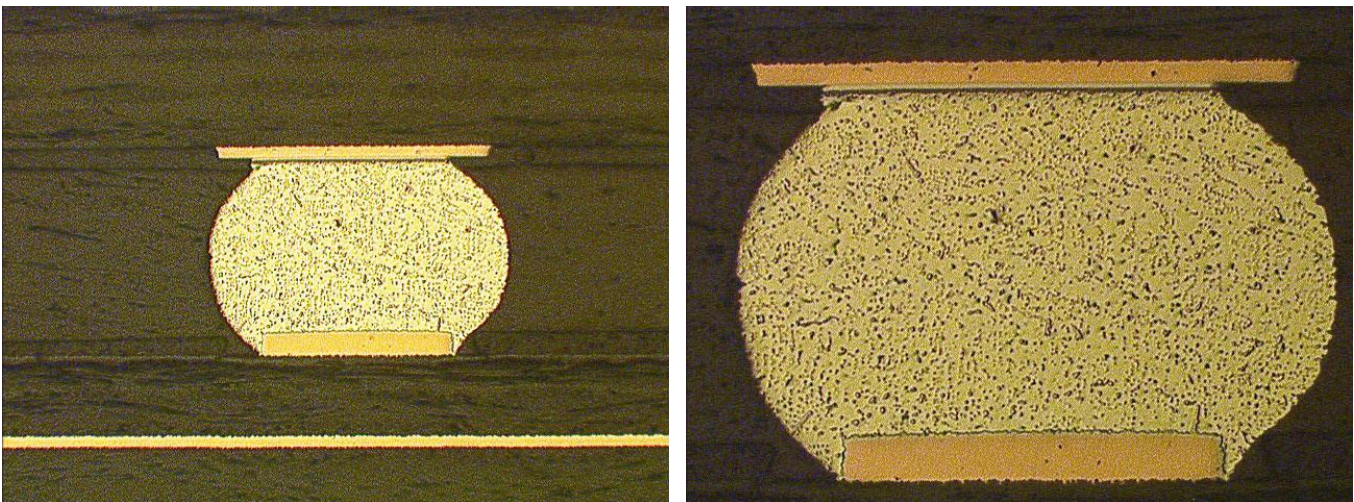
PBGA-225 Solder Joints, Board 127, Component U5, SnPb/SAC405, DNF
